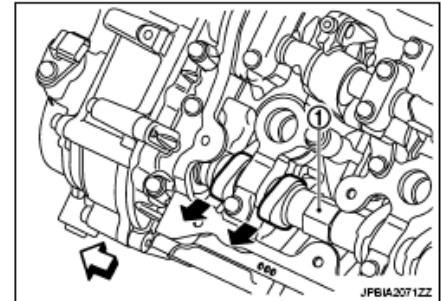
Checking Exhaust Cam Nose On No. 1 Cylinder
